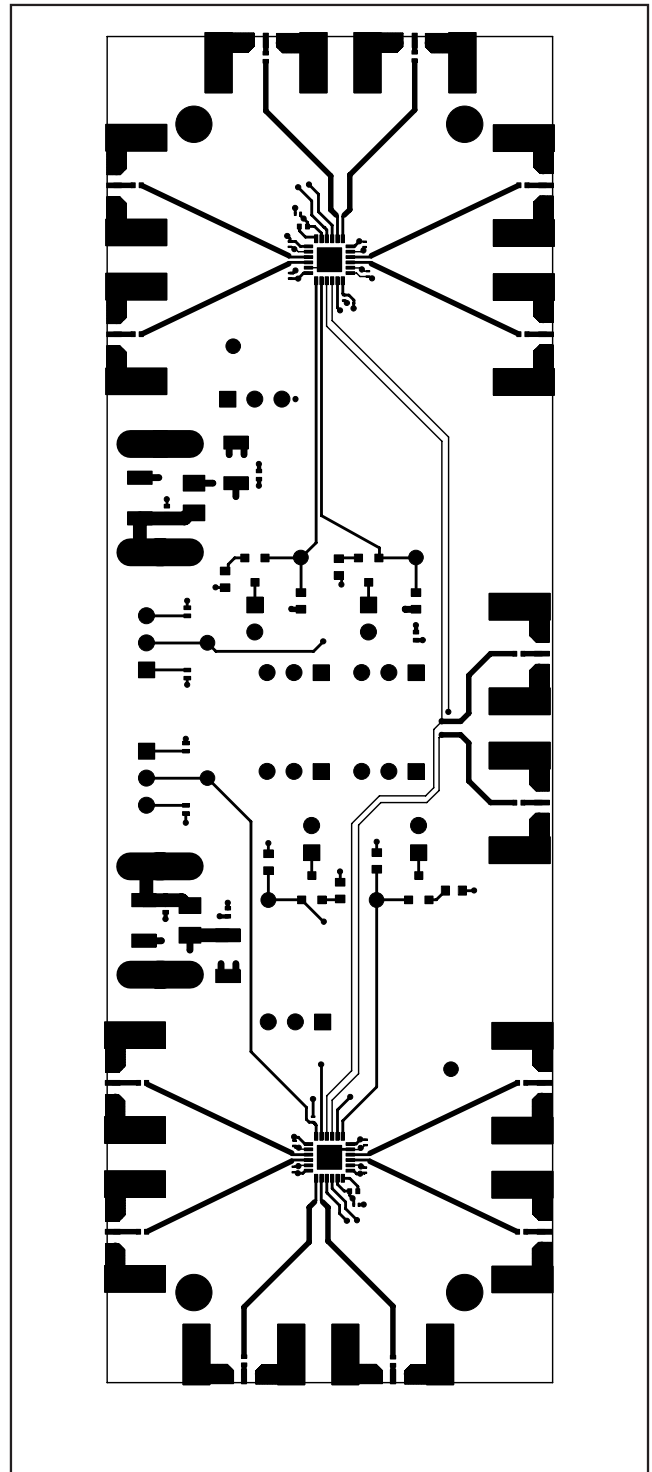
MAX3991/MAX3992 EV Kit PCB Layout—Component Side
